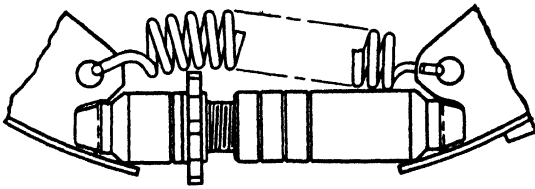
ADJUSTABLE STRUT OF BENDIX DUO-SERVO BRAKE.
